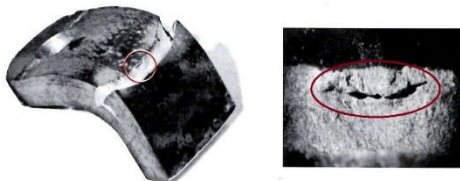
Trailer Hitch bending fracture with pre-existing crack
